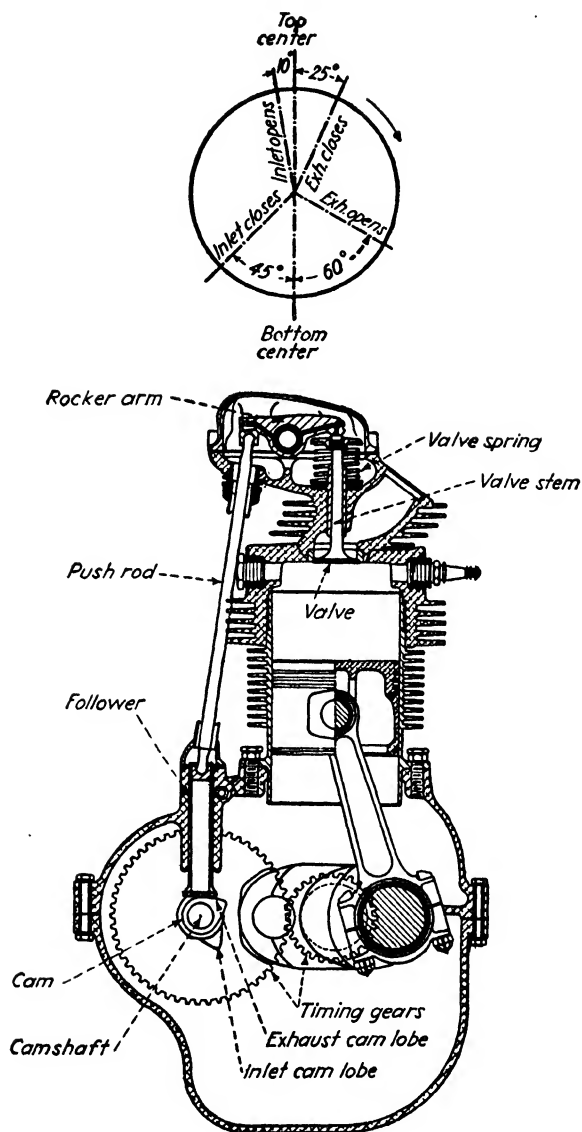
Valve mechanism and timing diagram, four-cycle engine. Diagram shows exhaust-valve mechanism only. Inlet-valve mechanism is similar, and in the engine illustrated is located behind the exhaust-valve mechanism.
